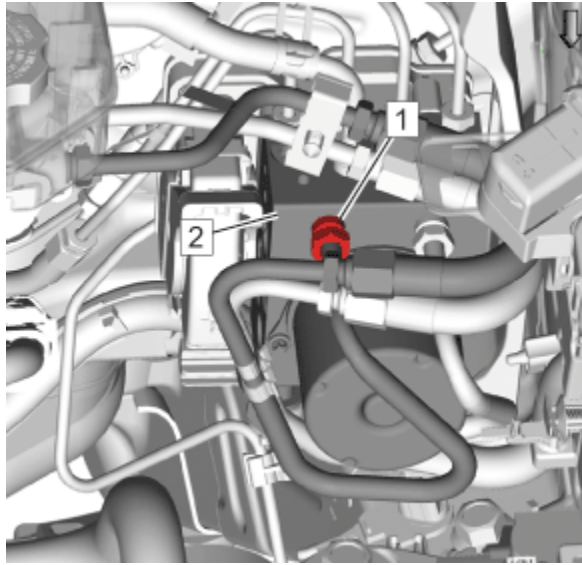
Brake Pressure Modulator Valve And Brake Pressure Modulator Valve Primary Pipe
